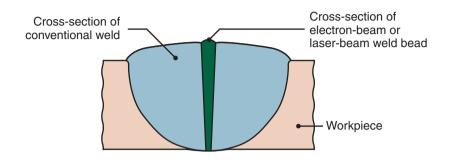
The relative sizes of the weld beads obtained by tungsten-arc and by electron-beam or laserbeam welding.
